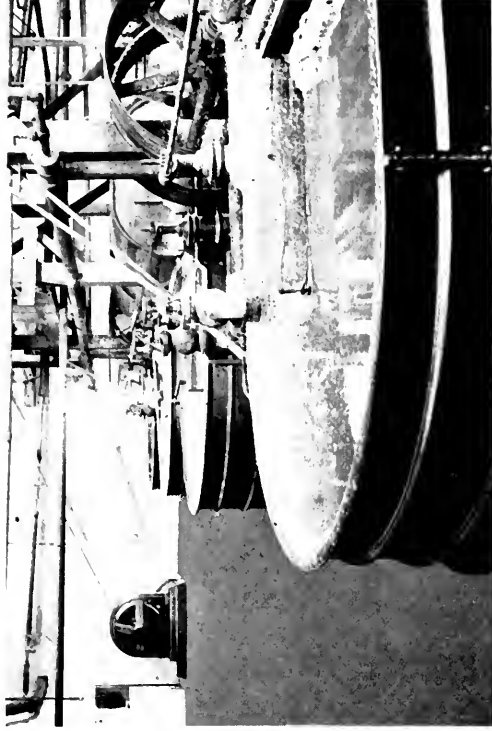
175-h.p., 600-r.p.m. Induction Motor Driving four 800-lb. Beaters, one Jordan, two Stock Pumps and one Agitator. Allen Mill Bag and Paper Co., Hudson Falls, N. Y.
